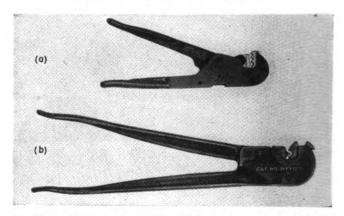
Hand tools for application of indent type terminals: (a) Tool for No. 16 through No. 10 wire sizes; (b) Tool for No. 8 through No. 4 wire sizes
